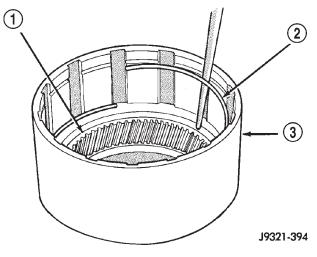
Clutch Drum Inner Retaining Ring Installation
